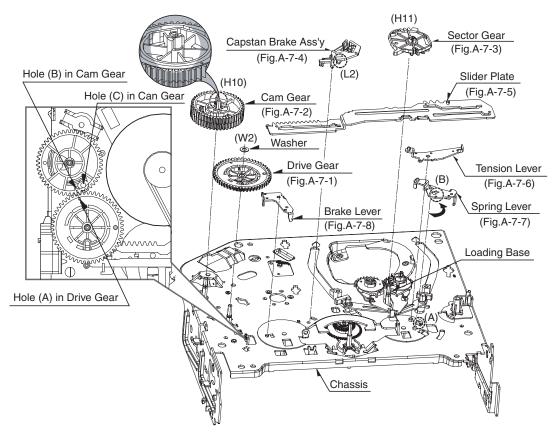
Drive Gear, Cam Gear, Sector Gear, Capstan Brake Ass'y, Slider Plate, Tension Lever, Spring Lever, Brake Lever
